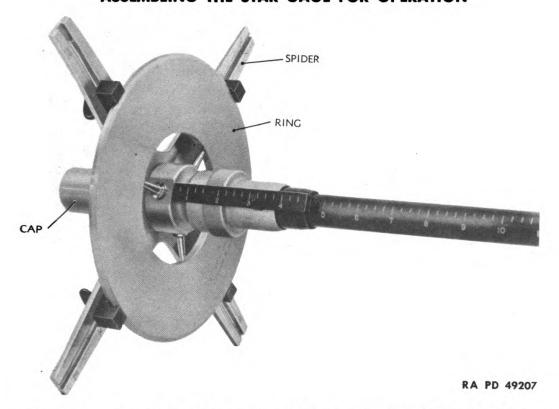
Size Ring and Size-ring Spider Installed on 2-inch Star Gage
